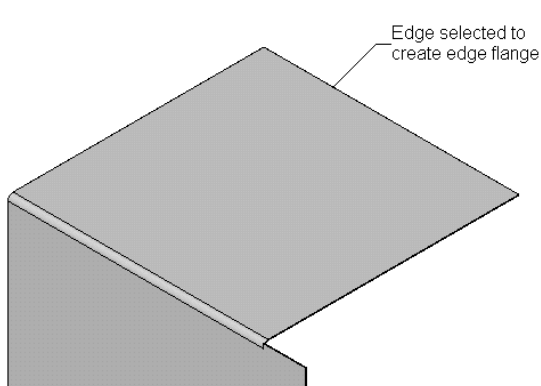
Edge selected to create the edge flange Figure 16-139 Model after creating the second edge flange
